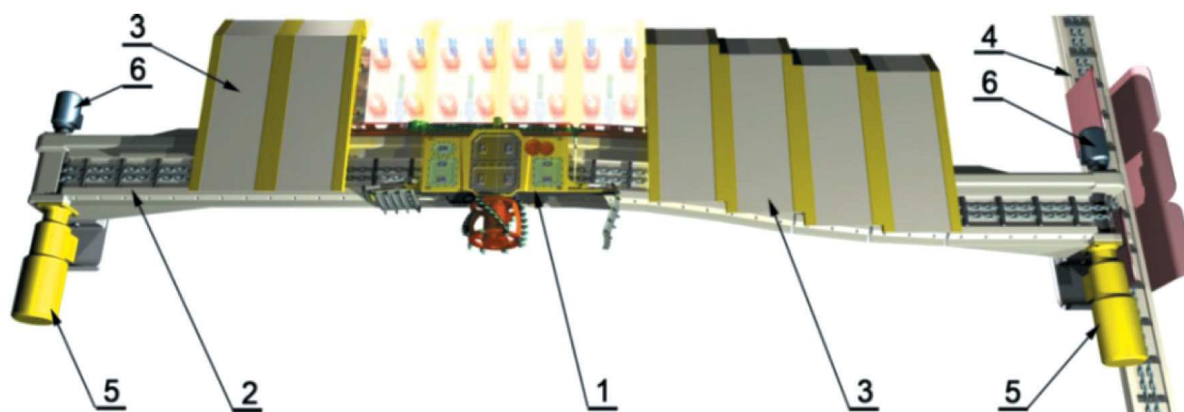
Model of mechanized longwall system equipped with single cutting head shearer [5]
